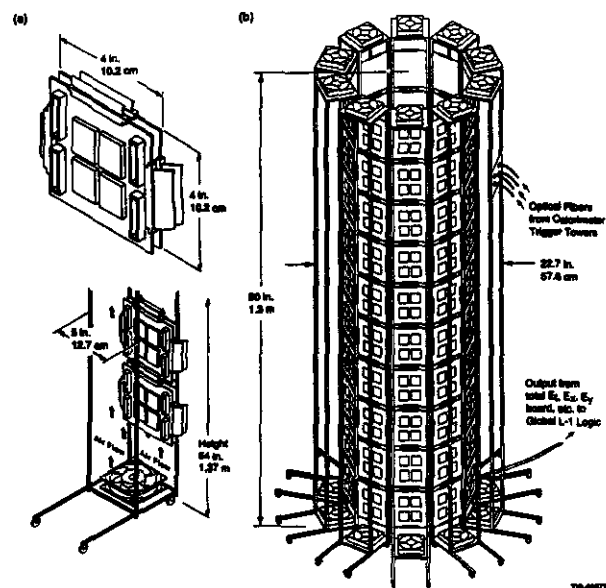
a) Details of the 3D-Flow programmable processing system crate assembly. b) The layout and dimensions of the complete digital Level-1 trigger system.
